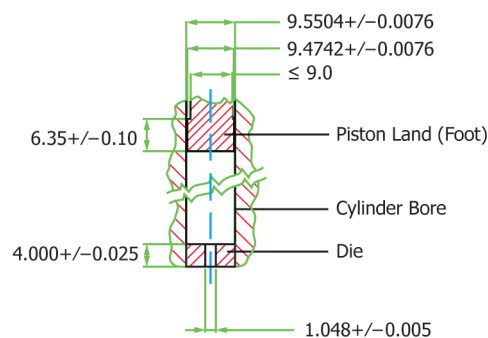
Dimensions of the cylinder bore, piston foot & "half" die
